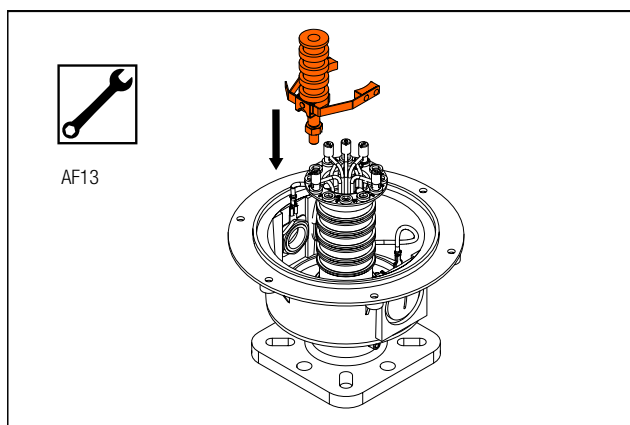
Place new PH+ current collector with the insulator, brush bolt and nut onto the housing lower part. Check the alignment of the current collectors with the slip rings and tighten the nut.
